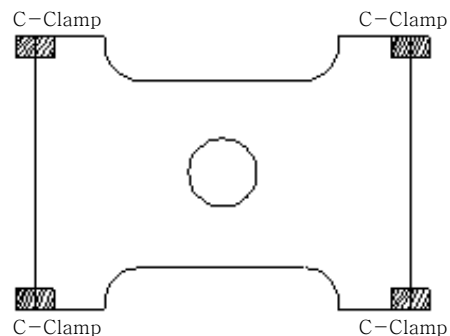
Restraint conditions for the test specimen during welding and cooling
